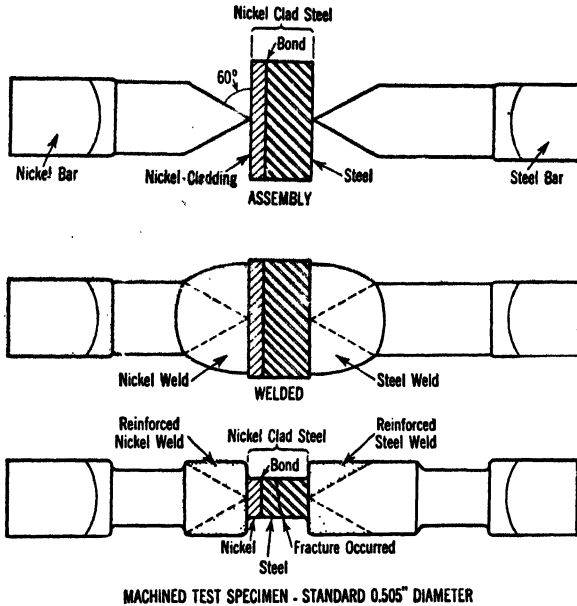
Physical Test of Nickel-to-Steel Bond. Fracture occurred in steel-plate portion at 55,500 psi.
